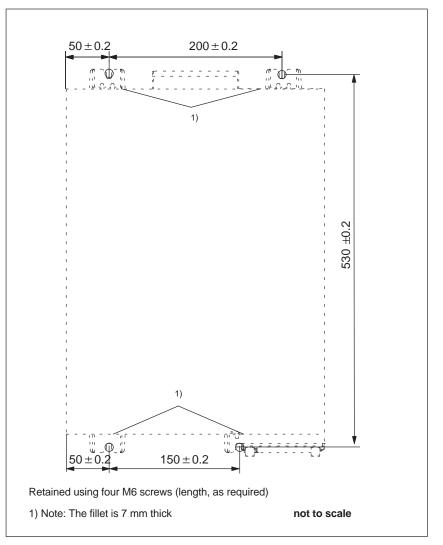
Hole dimensions, POSMO CA 9A and POSMO CD 18A
